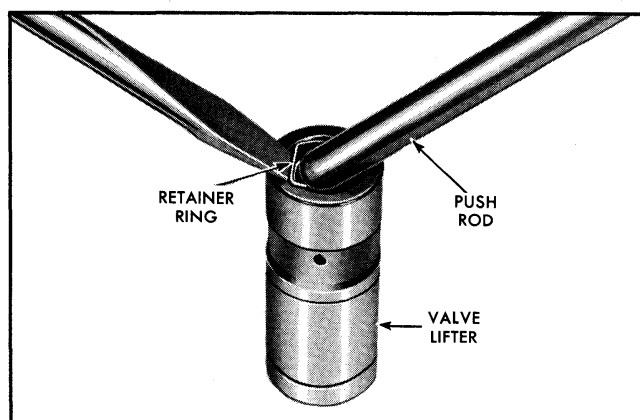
Removing Push Rod Seat Retainer Ring
